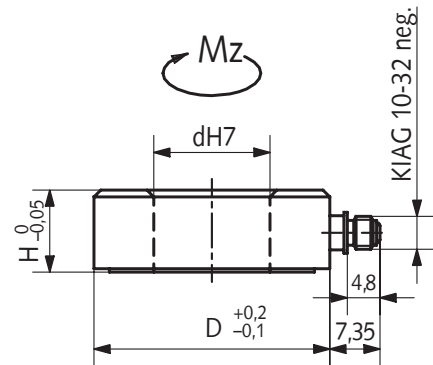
Dimension quartz torque sensor, Type 9039 ... 9069
